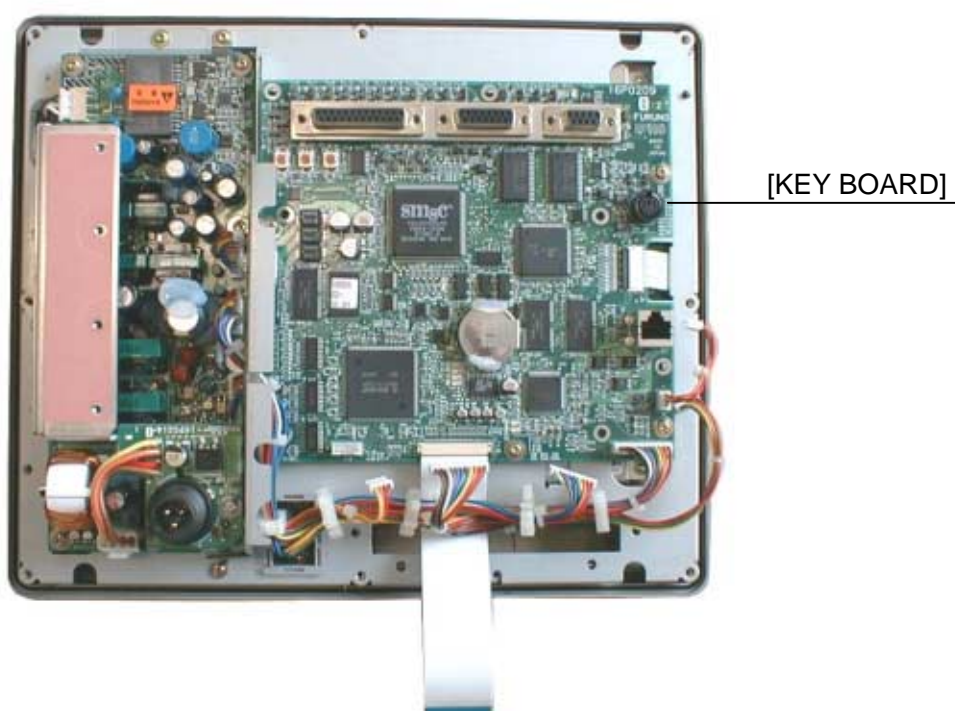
Terminal unit with RF CON/CPU board removed
